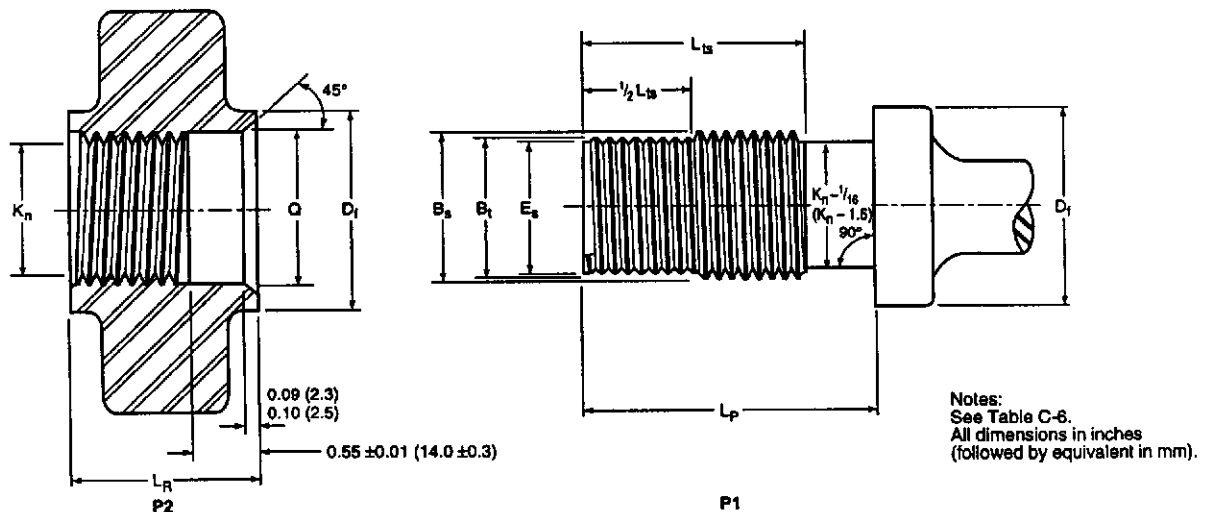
Go Pin-Thread Gauges (For Gauging Polished Rod Pin Connections)
